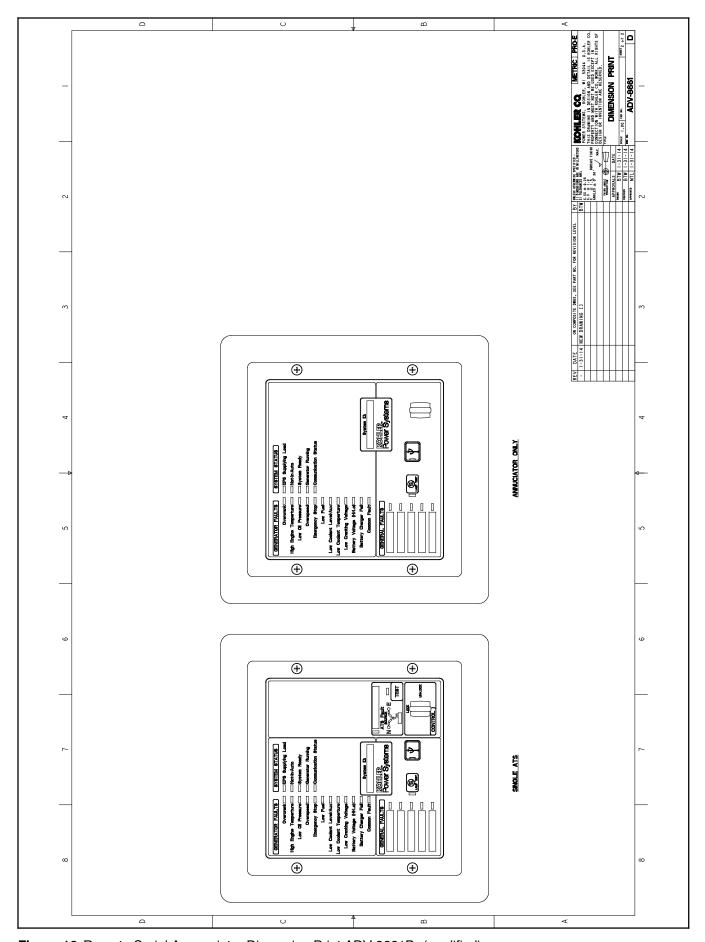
Remote Serial Annunciator Dimension Print ADV-8661B- (modified)
